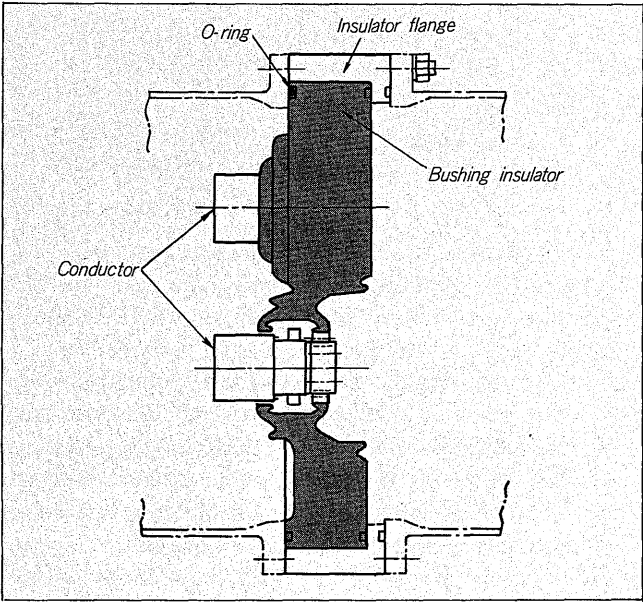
Gas seal construction at the flange of a GIS for outdoor installation
